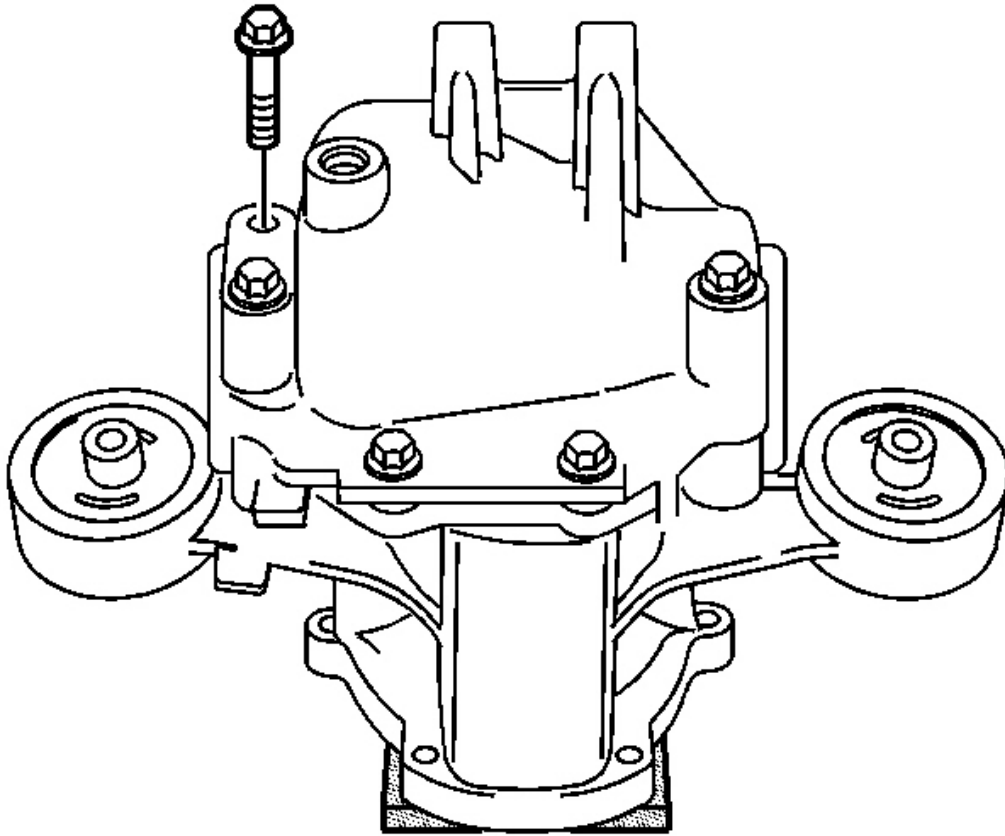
Removing/Installing 4 (M10) Cover Bolts
